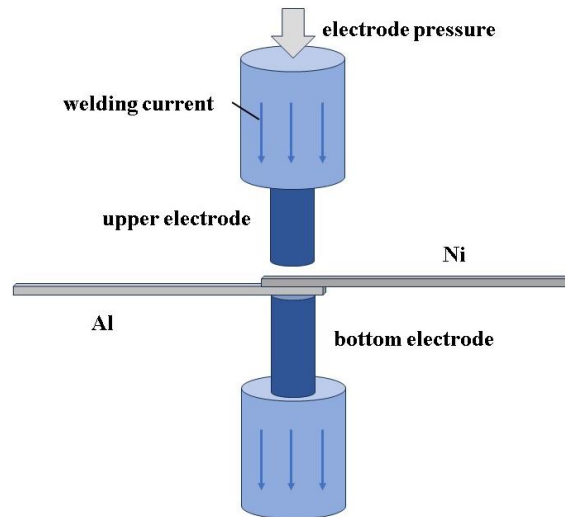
Schematic diagram of welding method of resistance spot welding
